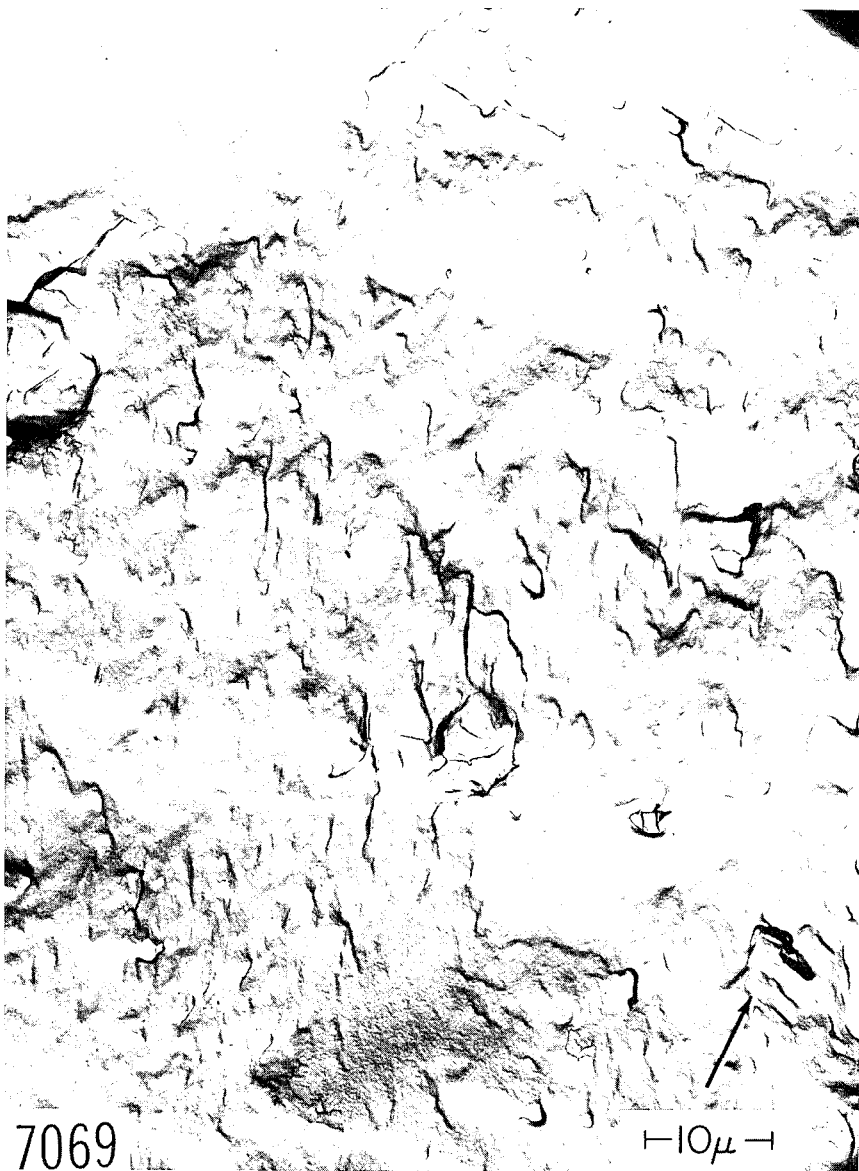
Fatigue markings in the WR crack shown in Fig. 82. Cellulose acetate-carbon replication technique. Palladium shadowed. 2500X.
